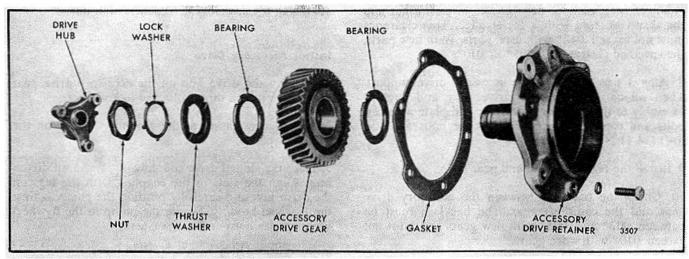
Accessory Drive Details and Relative Location of Parts
